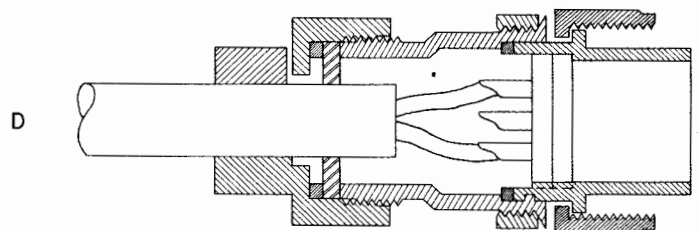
Assembly of Plug AN3106B-20-3S to Two Conductor no. 8 Rubber Covered Wire for A.C. Input Connections
